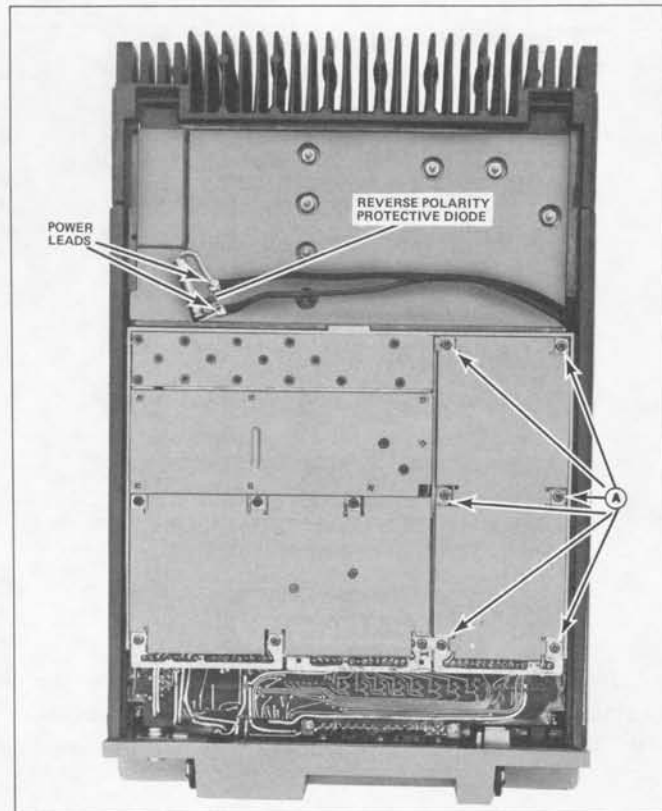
DISASSEMBLY PROCEDURE BOTTOM VIEW
